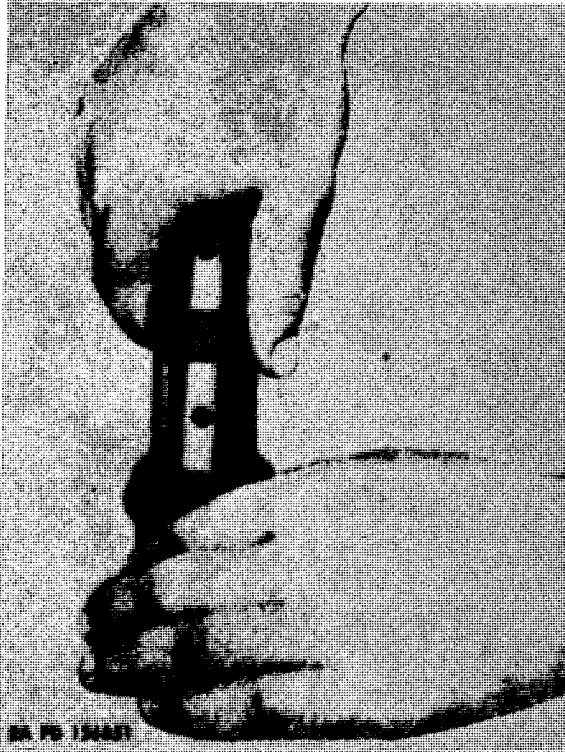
Using tubular wrench 41-W-3726-140 to remove eyepiece retaining ring A316640.
